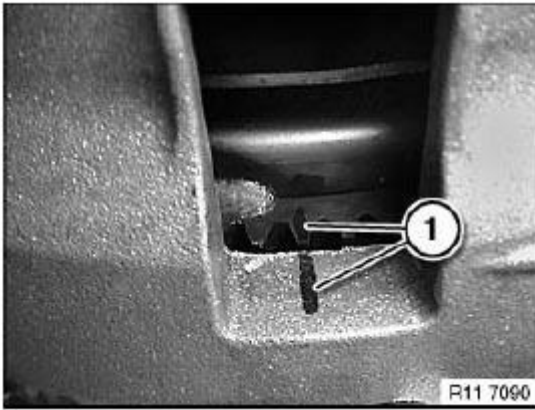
Identifying Flywheel And Transmission Housing Marking Line
